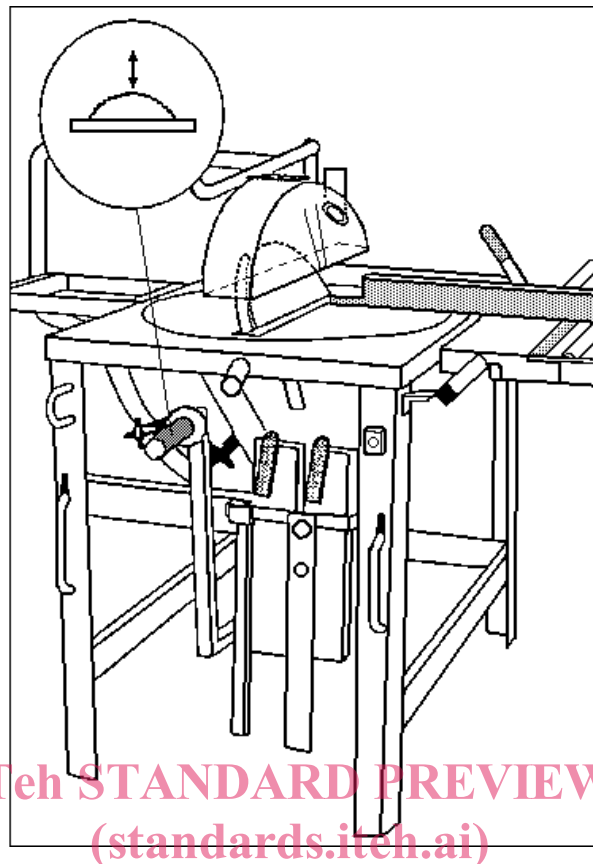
Example of a machine in the cross-cutting mode with stationary workpiece
